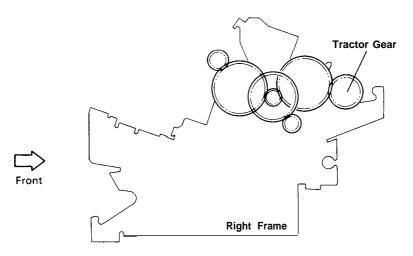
Arrangement of Gears in Rear Push Tractor Feed
